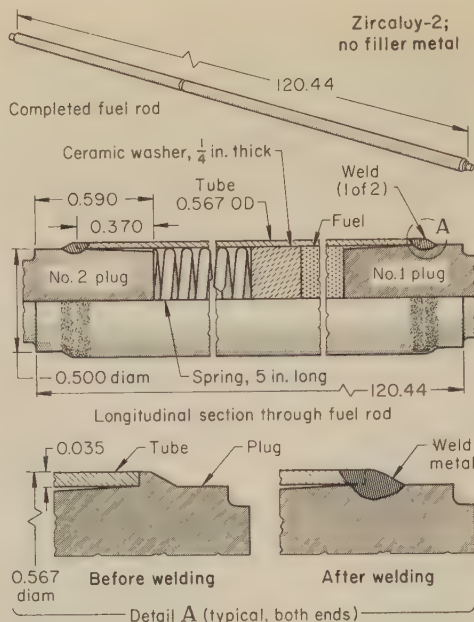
Zircaloy-2 nuclear fuel-rod assembly joined by automatic gas tungsten-arc welding in a vacuum-purge chamber (Example 133)
